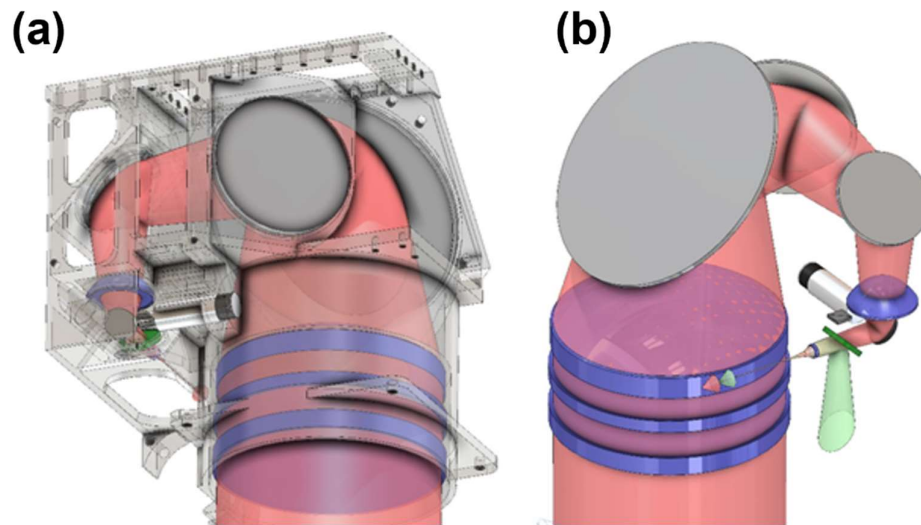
(a) Receiver assembly beam path inside the optical bracket. (b) Receiver optics assembly.
